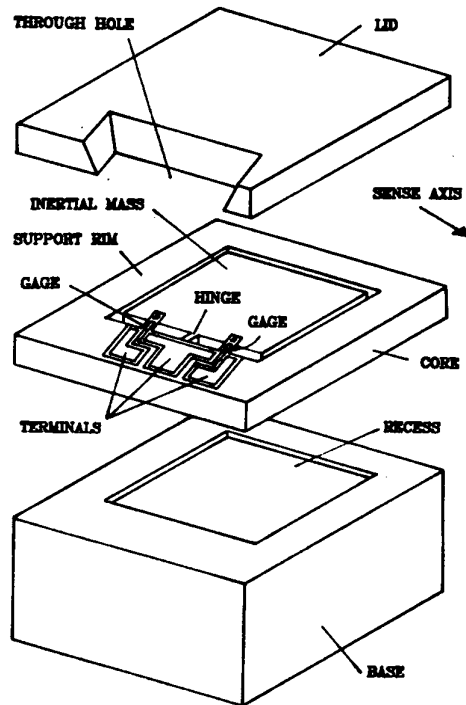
Exploded view of the piezoresistive accelerometer. (Patent Pending)
